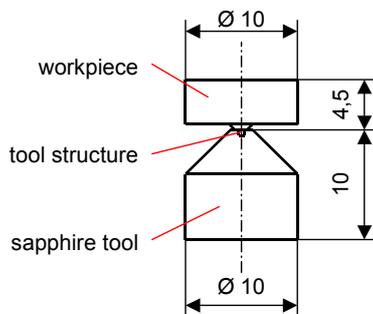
assembly and dimensions of the sapphire tool and the workpiece
